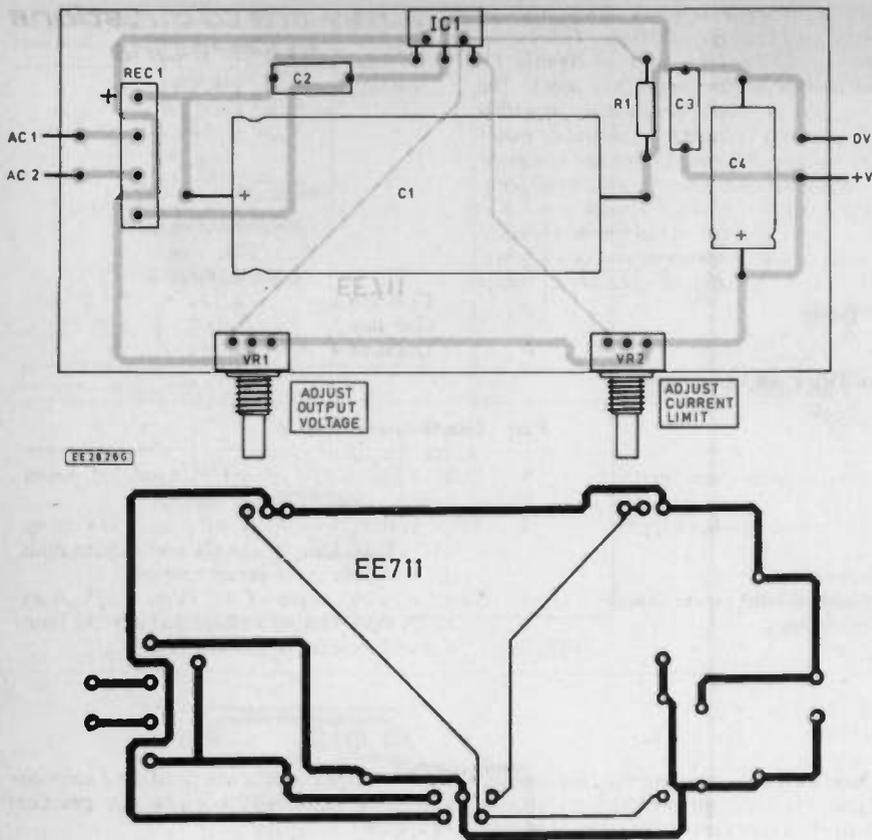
P.C.B. copper foil and component layout for the L200 power supply module
